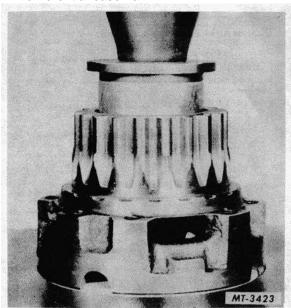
Installing Bushing in Rear Half of Differential Case.
